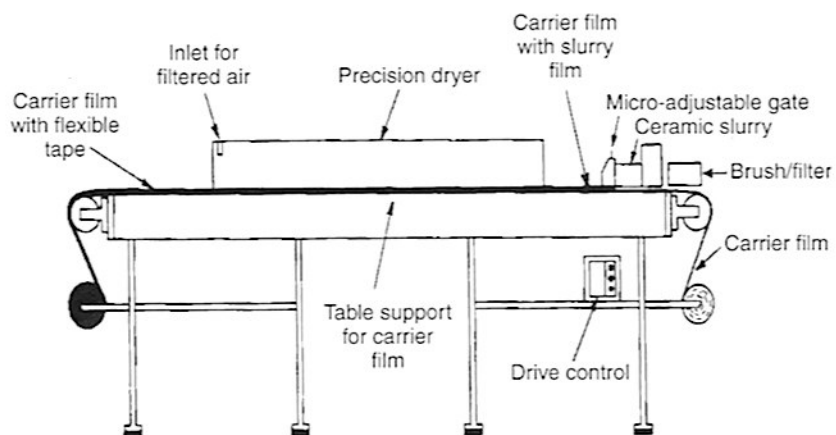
Diagram of a continuous casting machine (from Ref. [9]). This material is used by permission of John Wiley & Sons, Inc.
